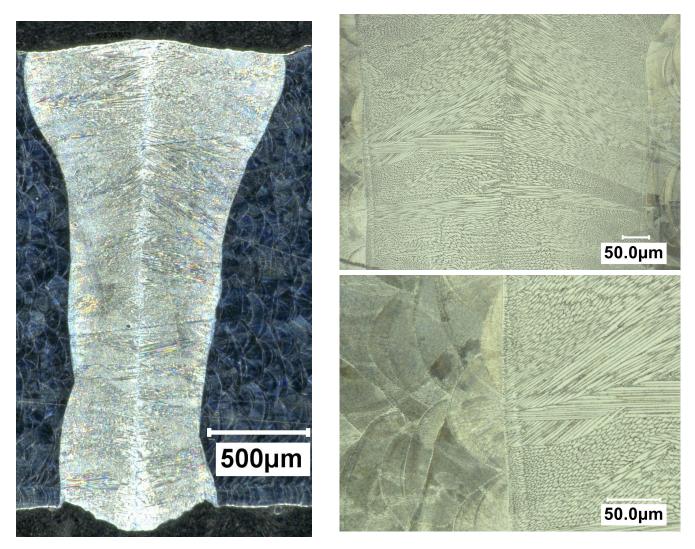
a) Full weld profile of the laser welded 316L, b) the fusion zone and c) heat affected zone.
